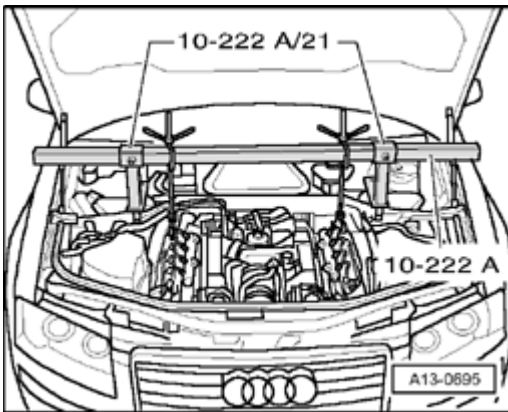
Securing Spindles Of Engine Support Bridge 10 - 222 A At Rear Engine Lifting Eyes
